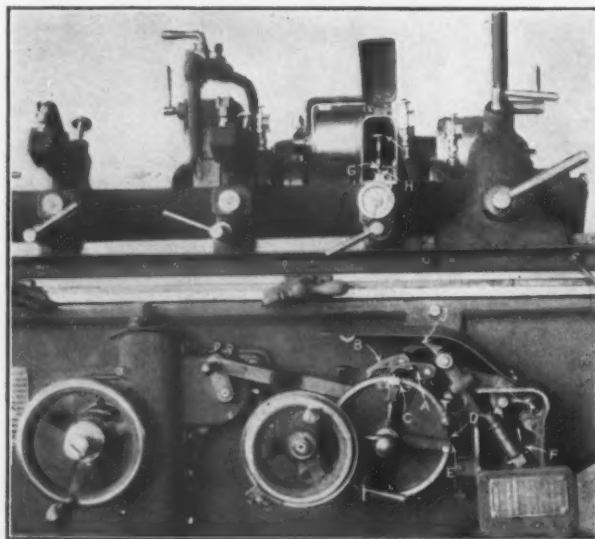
The Wheel Feed and Automatic Sizing Devices.
